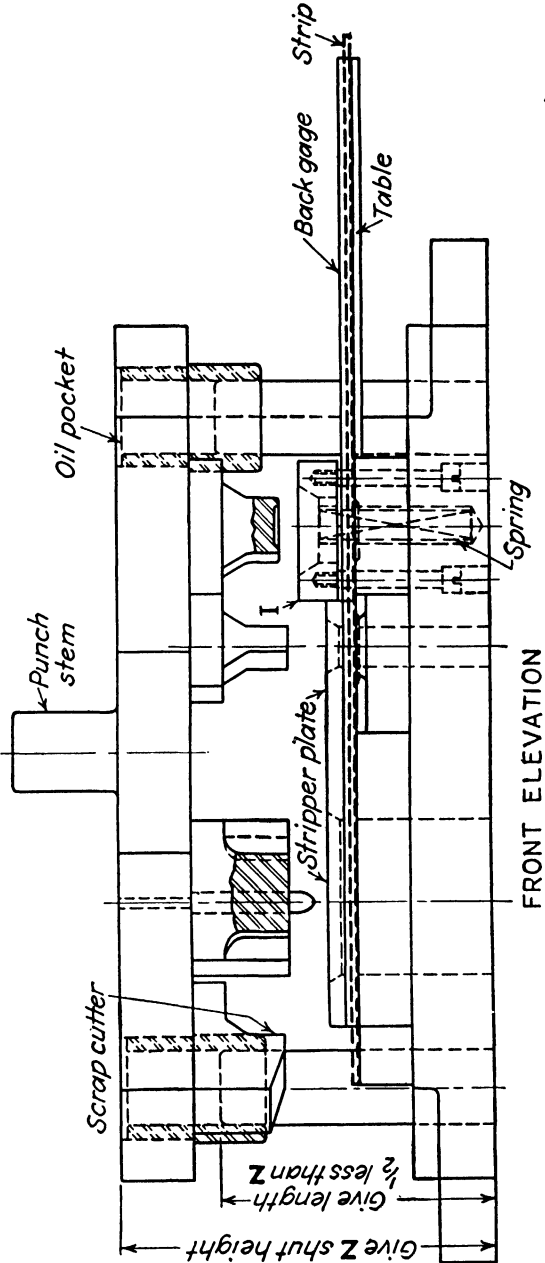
The assembled die for progressively stamping, blanking, perforating, blanking, and cutting off the scrap frame.
